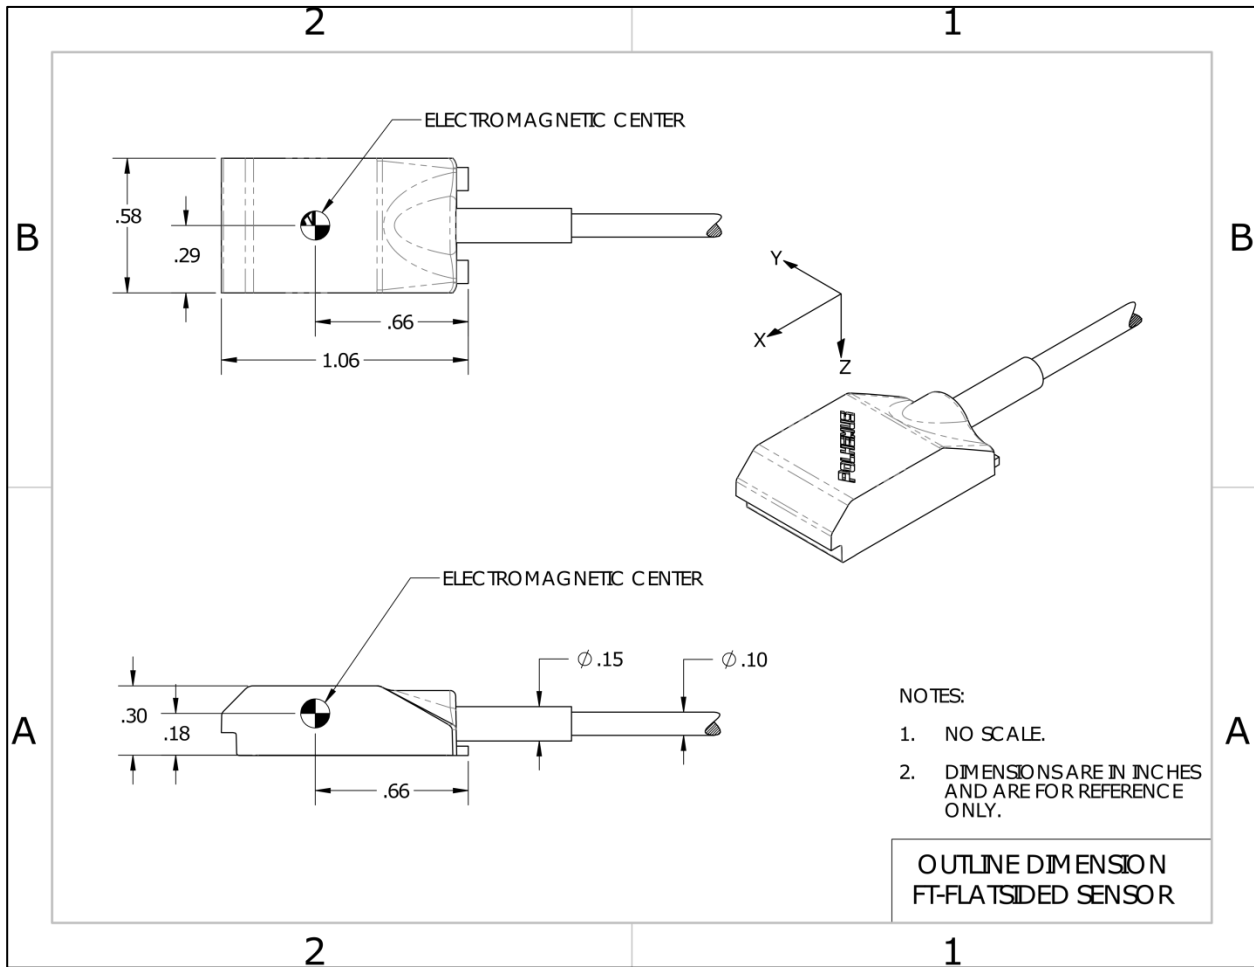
OUTLINE DIMENSIONS (APPROX.), VIPER™ FT-FLATSIDED SENSOR
